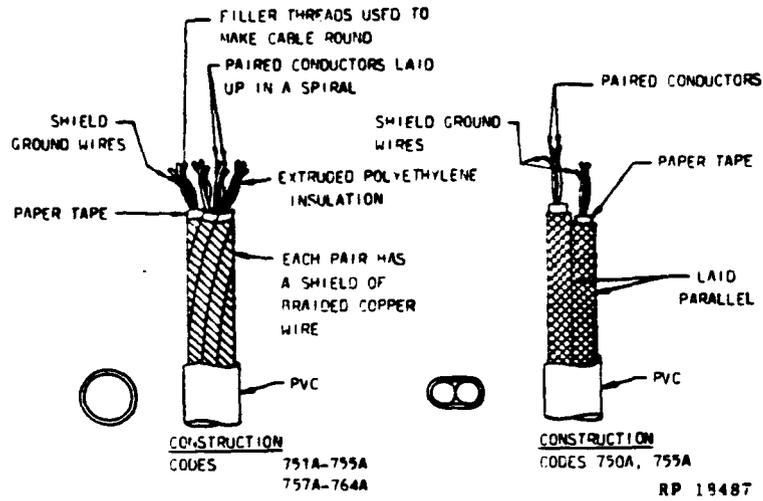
CONSTRUCTION OF CODES 750A TO 753A AND 755A TO 759A CABLES (PAR. 2.3.1)
